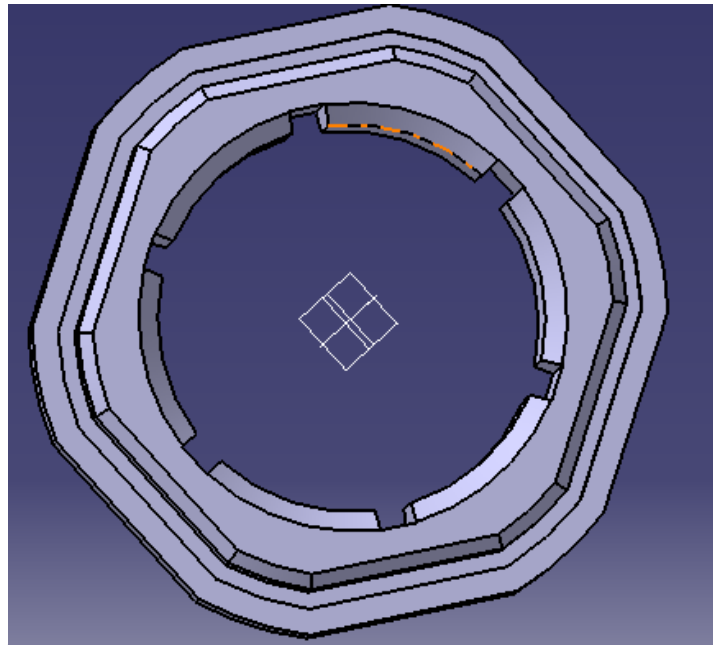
CATIA Model of Forging Drawing with Flash and Gutter
